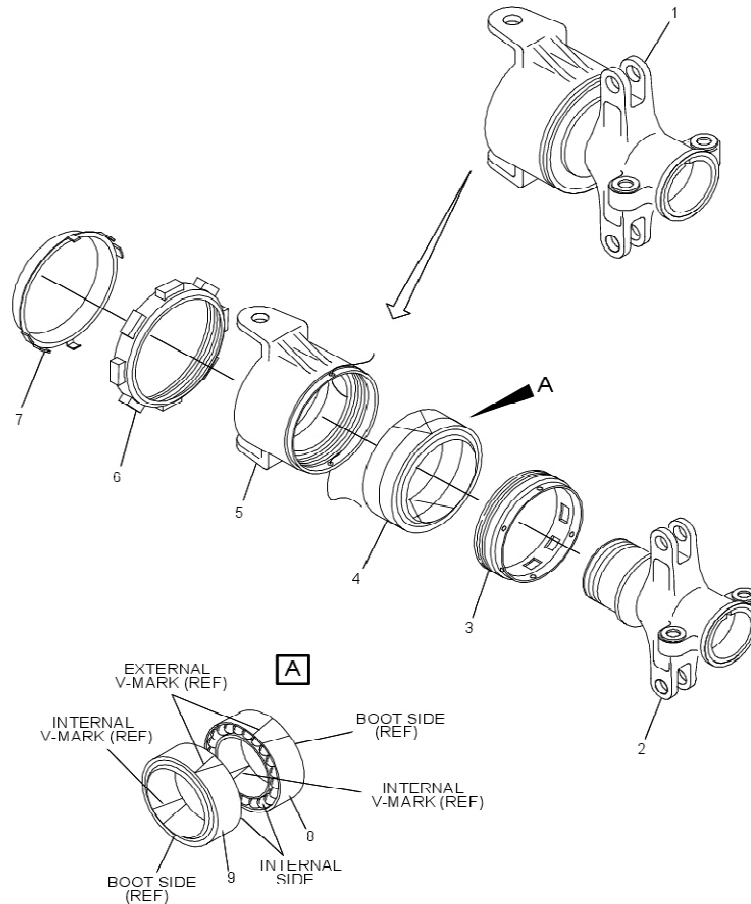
T/R Pitch change housing ring nut removal (Sleeve assy P/N 109-0130-94)
